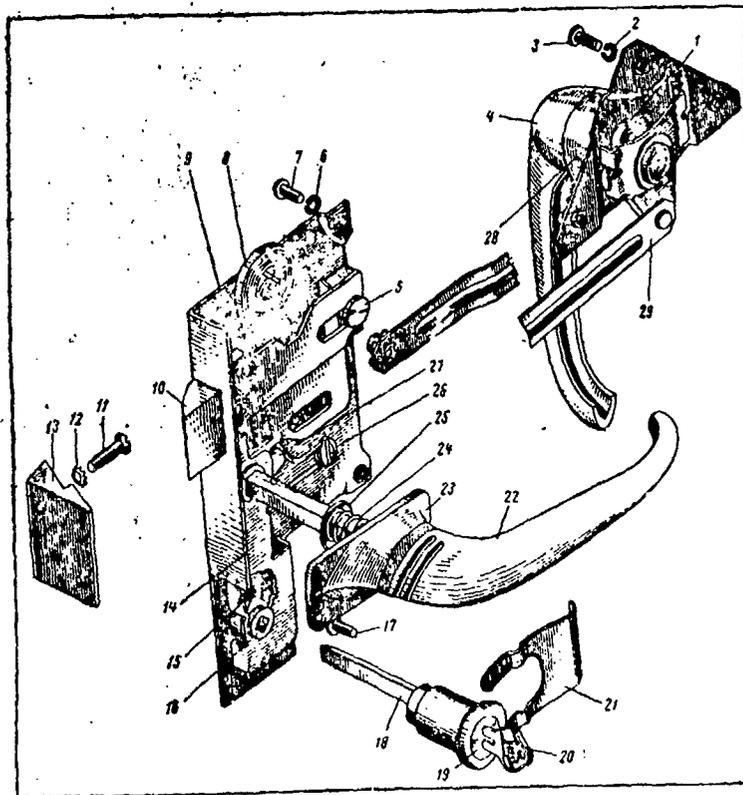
Lock and Lever of Right Door of ZIL-157K: 1, lock drive lever; 2, 6 and 12, washers; 3, 7, 11 and 17, screws; 4, inside handle; 5, pin; 8, lock spring; 9, lock body; 10, lock bolt; 13, lock face plate; 14, face cover; 15, lock slide; 16, lock cam; 18, door locking mechanism; 19, door lock; 20, key; 21, lock mounting plate; 22, outside handle; 23 and 28, mounting plates; 24, lever spring; 25, spring cup; 26, latch spring; 27, latch; 29, lock drive member
